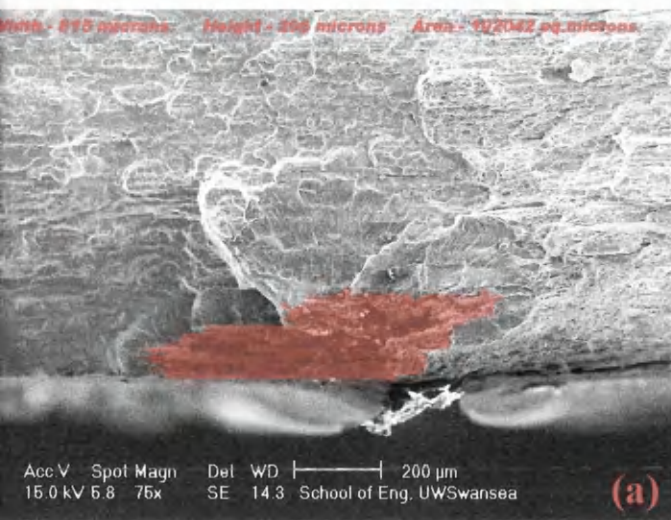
Schematic representation of corrosion pit metrics as viewed on the fracture surface of tested specimens.
